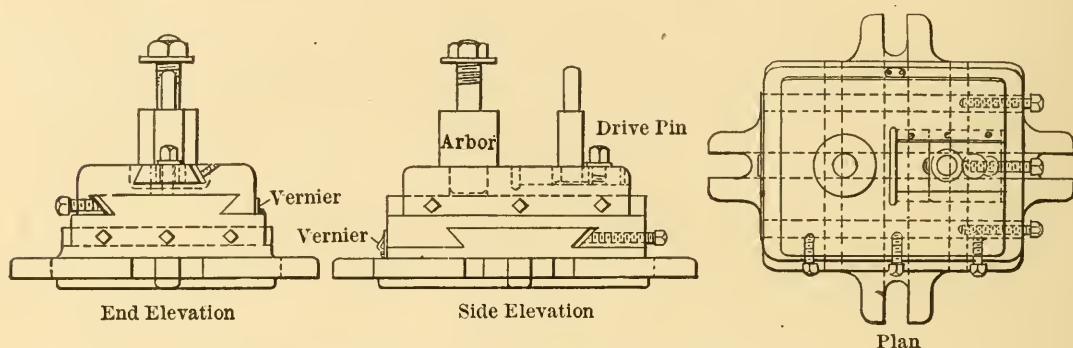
FIXTURE FOR CUTTING ELLIPTICAL GEARS.
